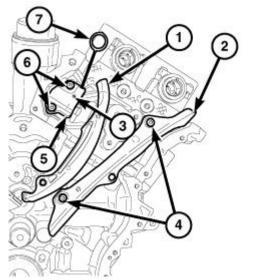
Left Cam Chain Tensioner, Arm, Guide & Bolts
